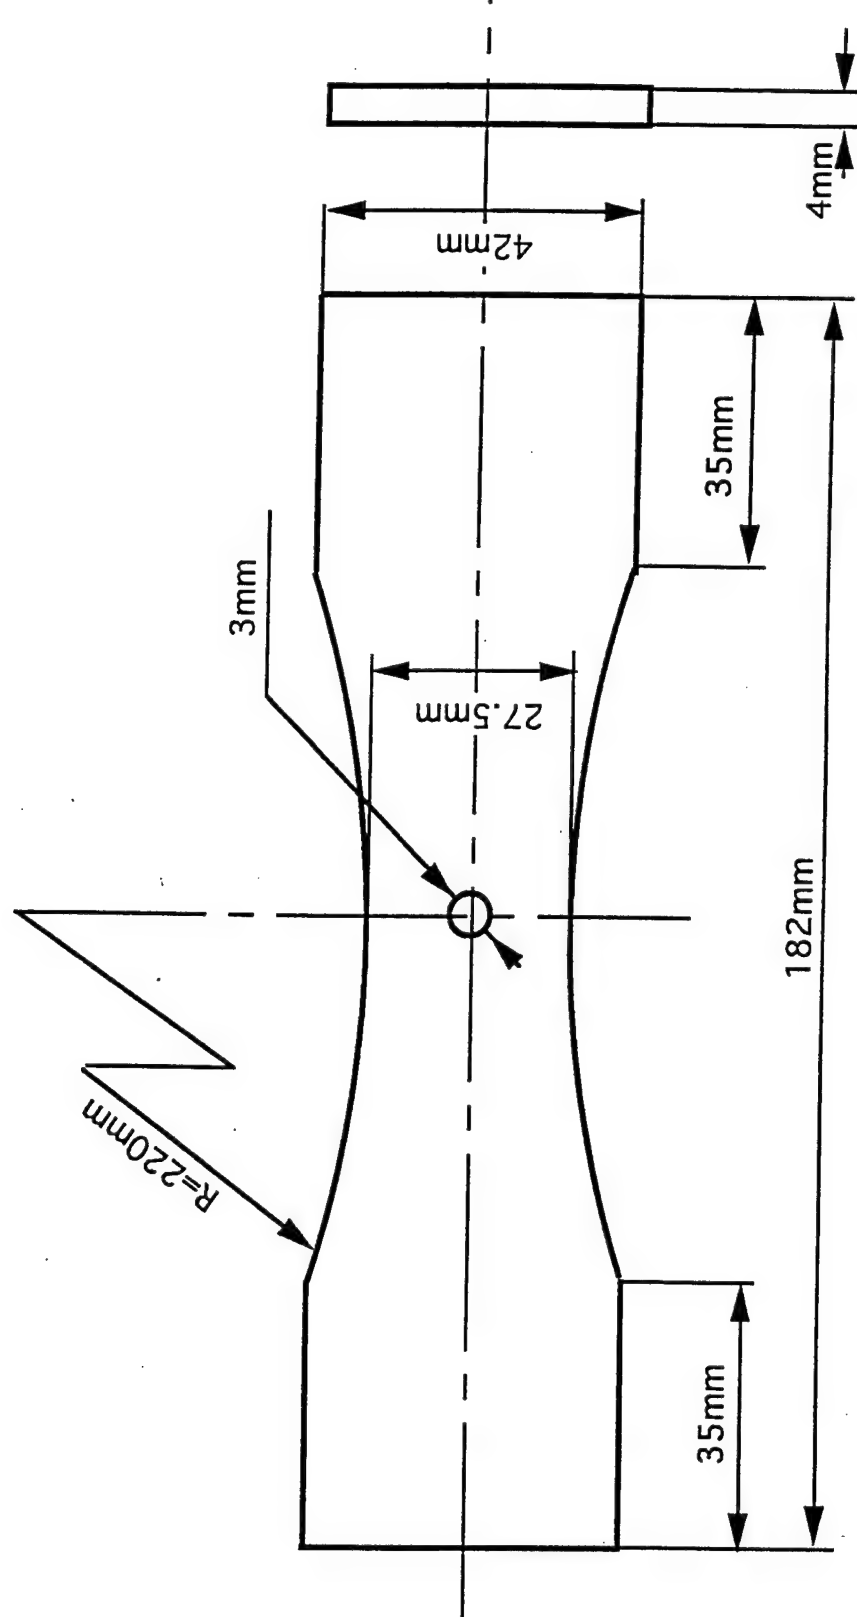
Rectangularly sectioned specimen design used in the Penn tests for testing prototype EFS cells, with and without a central hole. Hydraulic grips were employed for this design of specimen.
